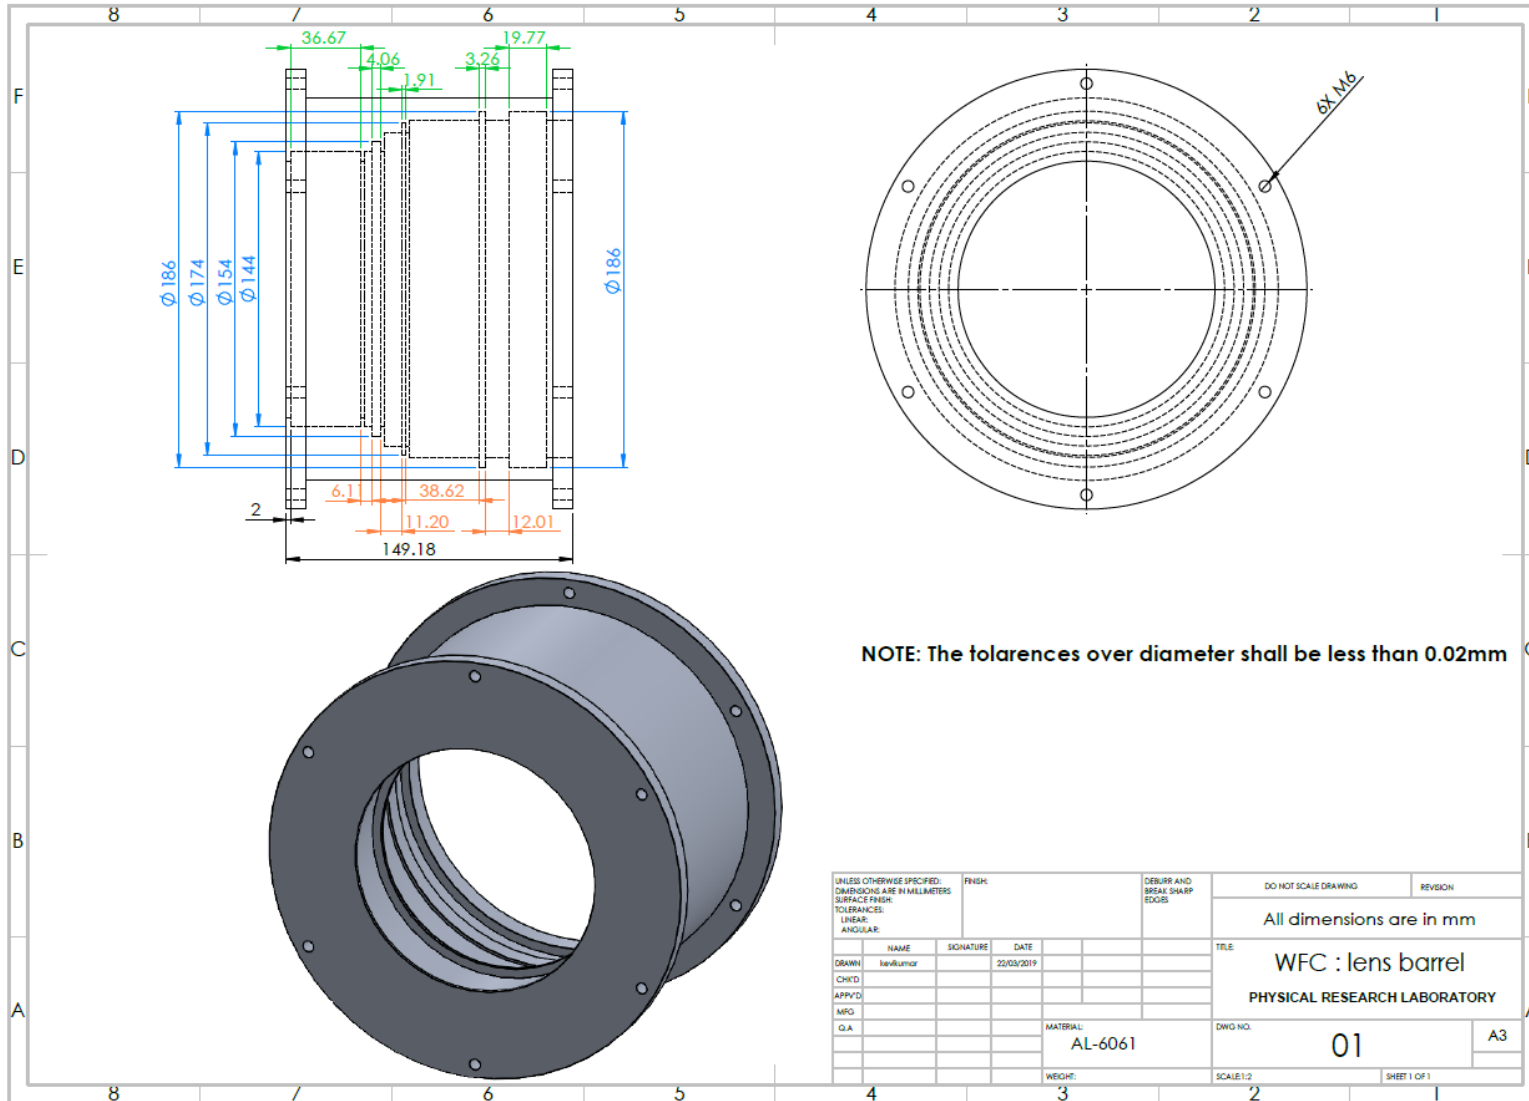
Mechanical design of the Integrated field correcting optics assembly (for reference only). Detail design and Fabrication drawing to be done by VENDOR after discussion during PDR.
